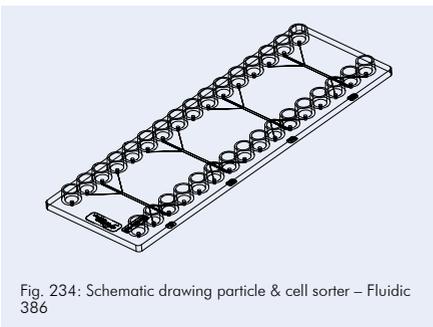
Schematic drawing particle & cell sorter – Fluidic 386
